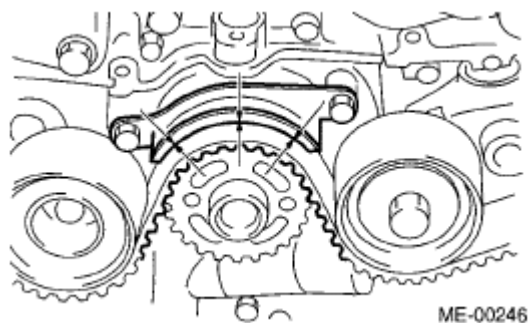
Identifying Clearance Between Timing Belt And Timing Belt Guide
